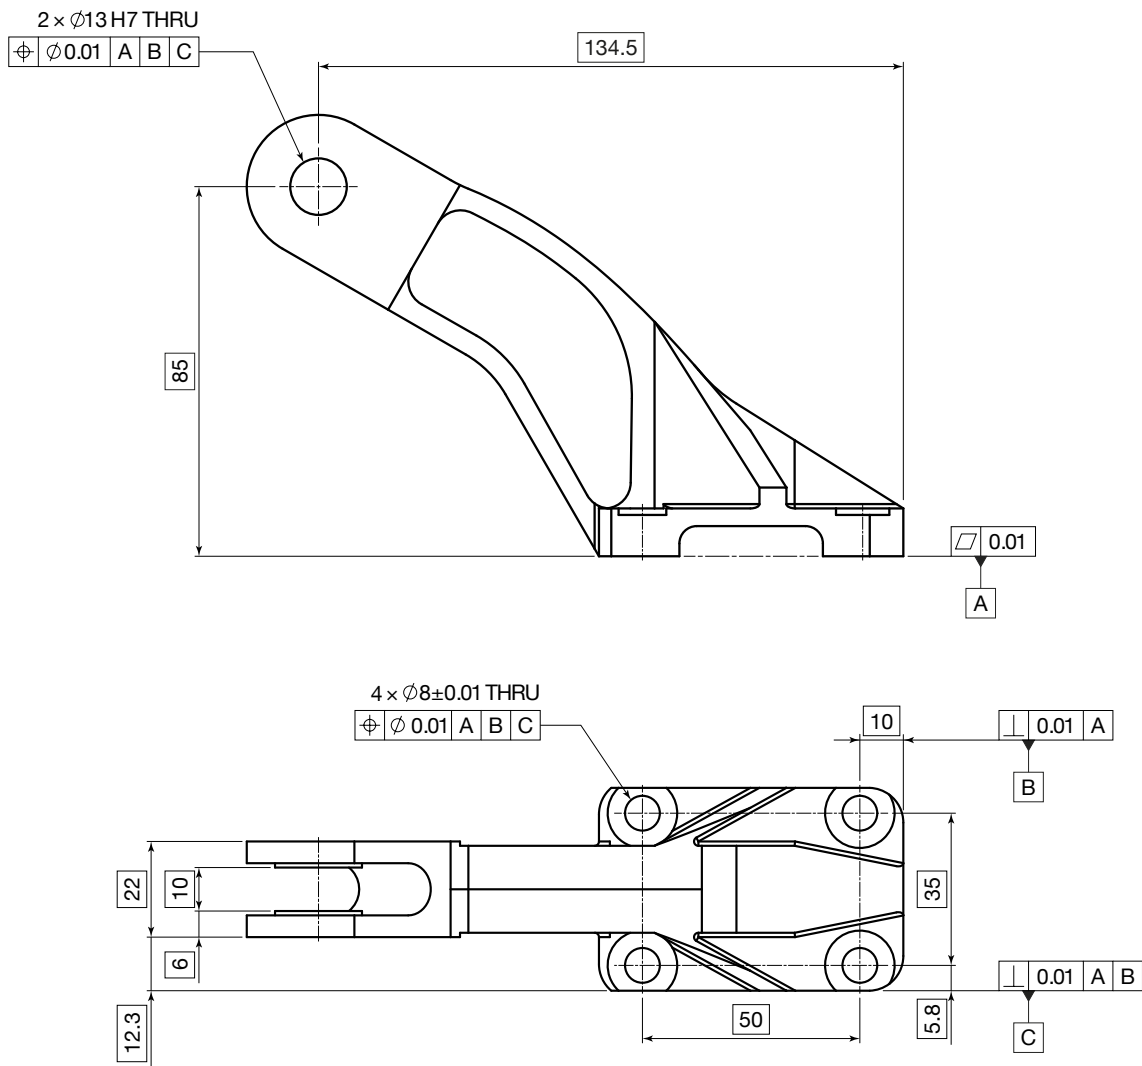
Dimensioned technical drawing of the aerospace bracket.
